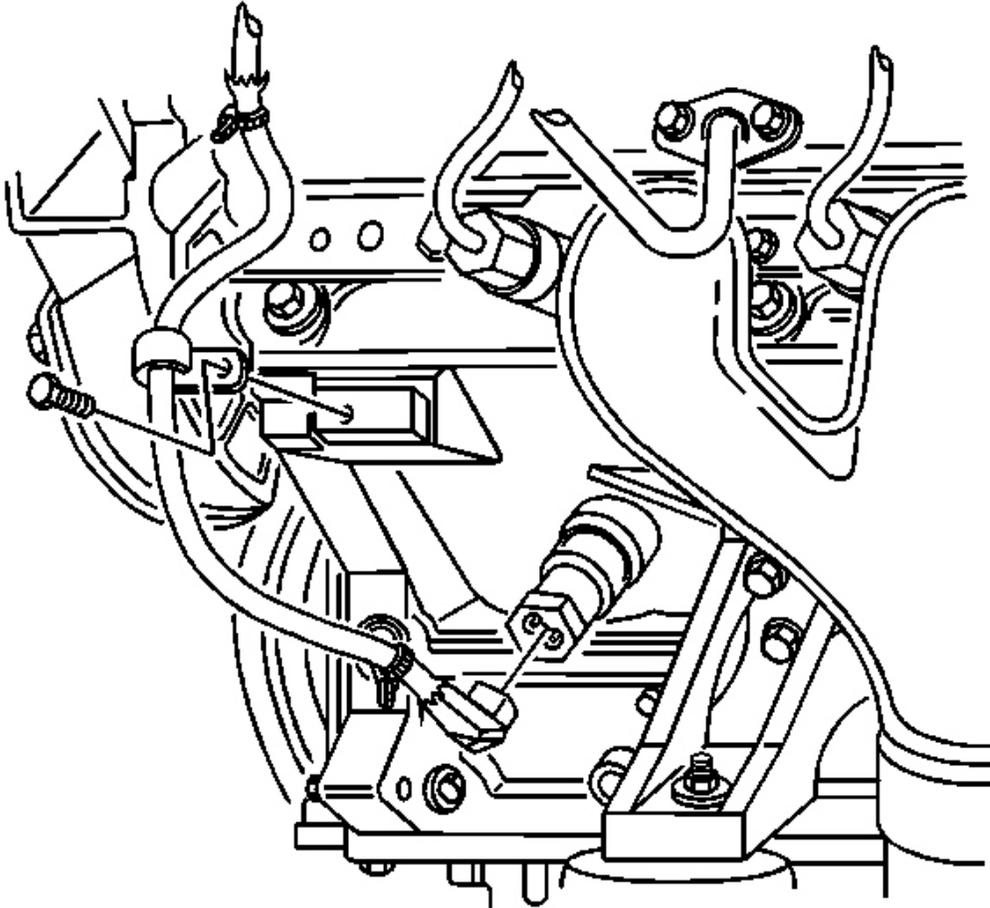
Engine Coolant Heater Cord To Engine Coolant Heater
